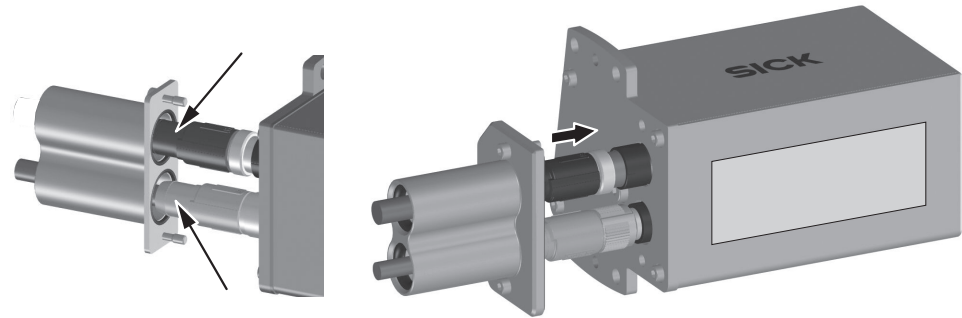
Assembly of IP69K protective housing, with use of the Ethernet connection – Step 3
